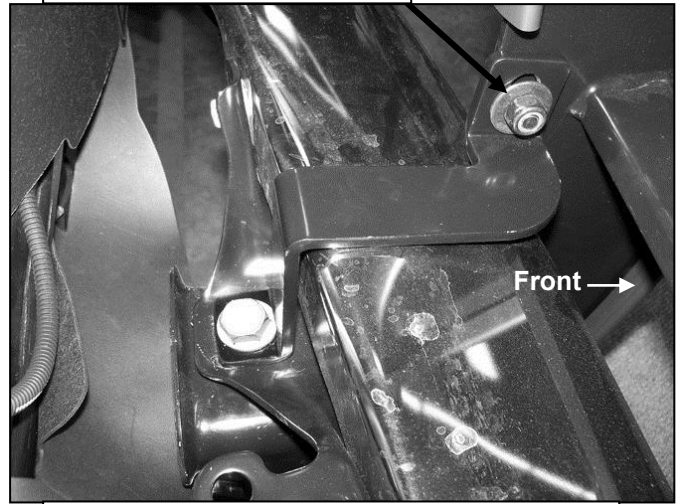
Apply adhesive backed Foam Tape to inner and outer surface of Top Brackets to protect factory bumper
